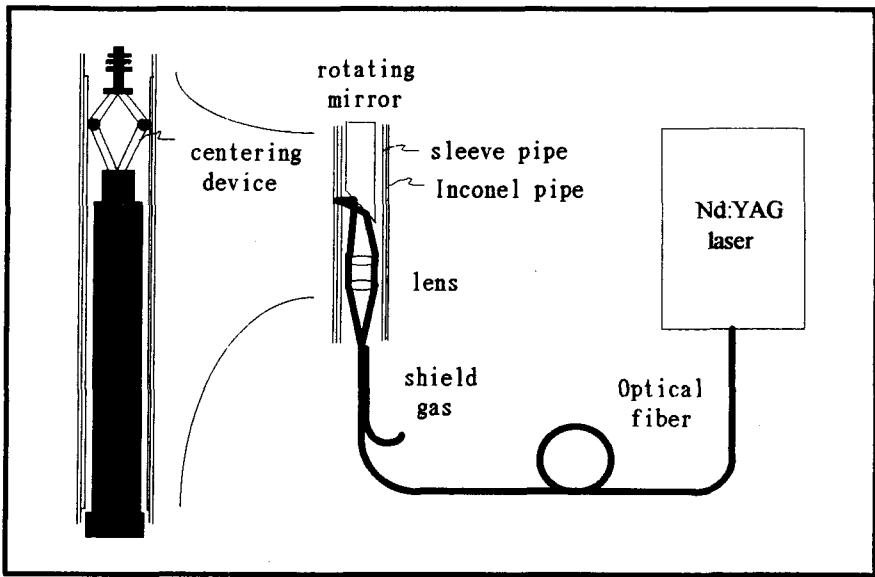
Schematic diagram of sleeve welding configuration.
